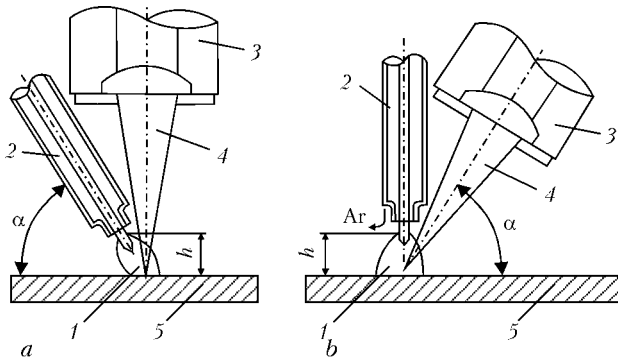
Scheme of hybrid TIGAL (a) and LATIG (b) welding processes: 1 – arc; 2 – TIG torch; 3 – laser; 4 – laser beam; 5 – workpiece
